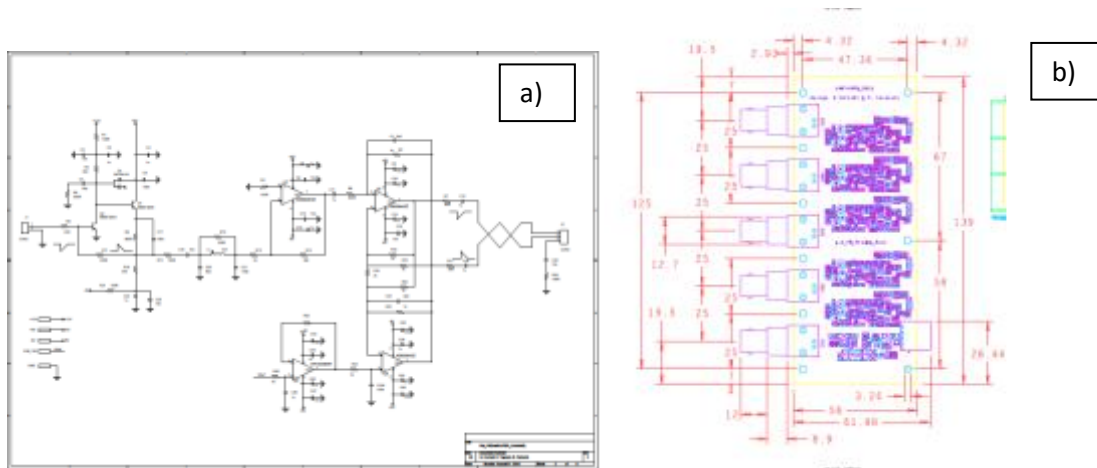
The electronic board: a) single channel scheme; b) 5 channels layout.
